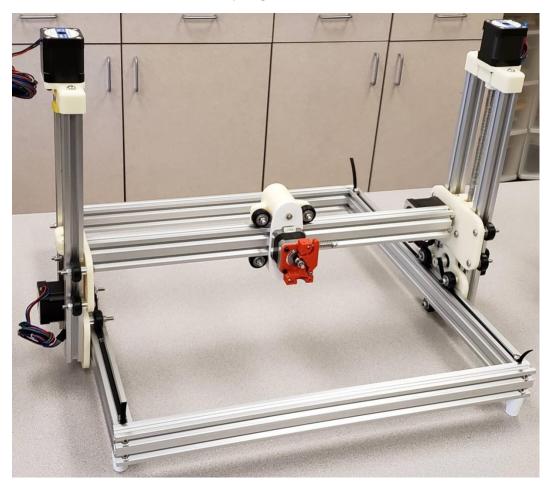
The CNC machine, assembly completed, configured for 3D printing
